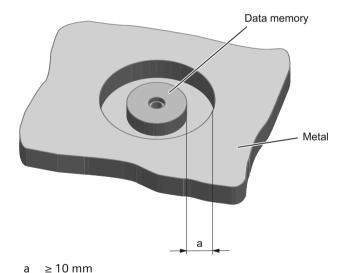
Flush-mounting of the MDS D423 in metal clearance
